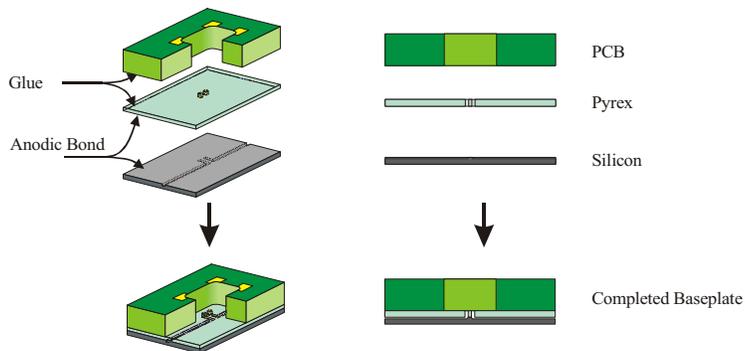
Example of a wet circuit board, where the modules will be mounted.
